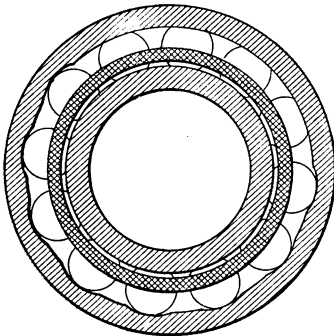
Bearing with Outer Ring Grooved to permit the Use of a One-piece separator.
